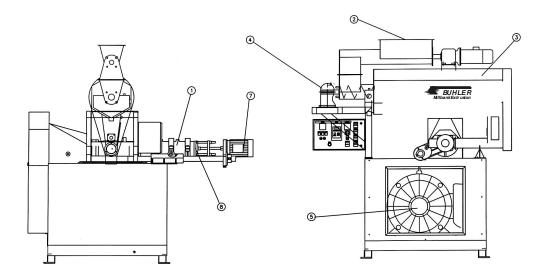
Layout of the Bühler Millbank Extrusion 501-SX/1001-SX/2001-SX 500-SX/1000-SX/2000-SX EXTRUDER
